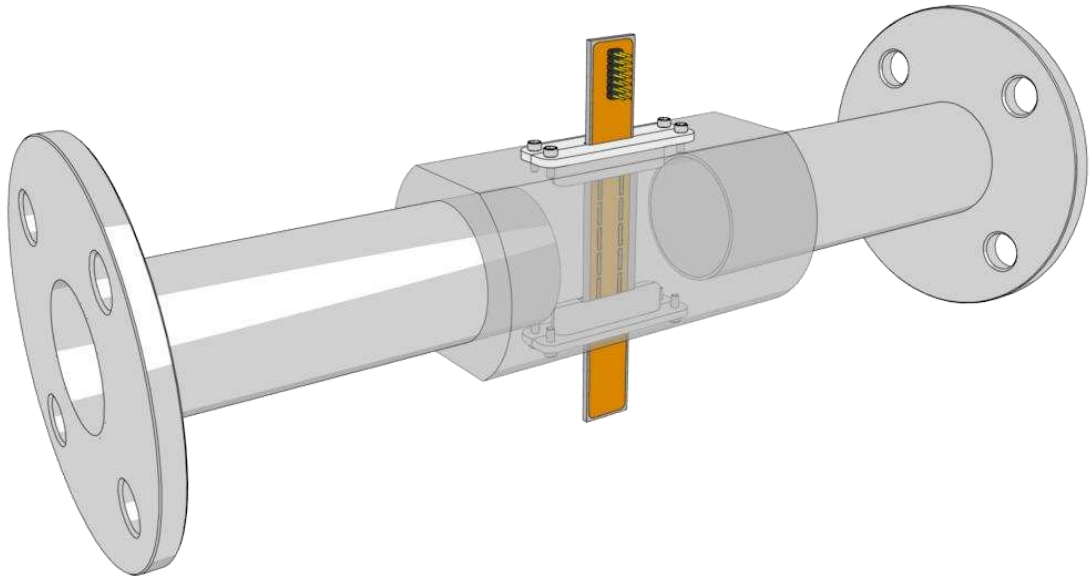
Illustration of the electrostatic sensor array mounted inside the custom pipe spool
